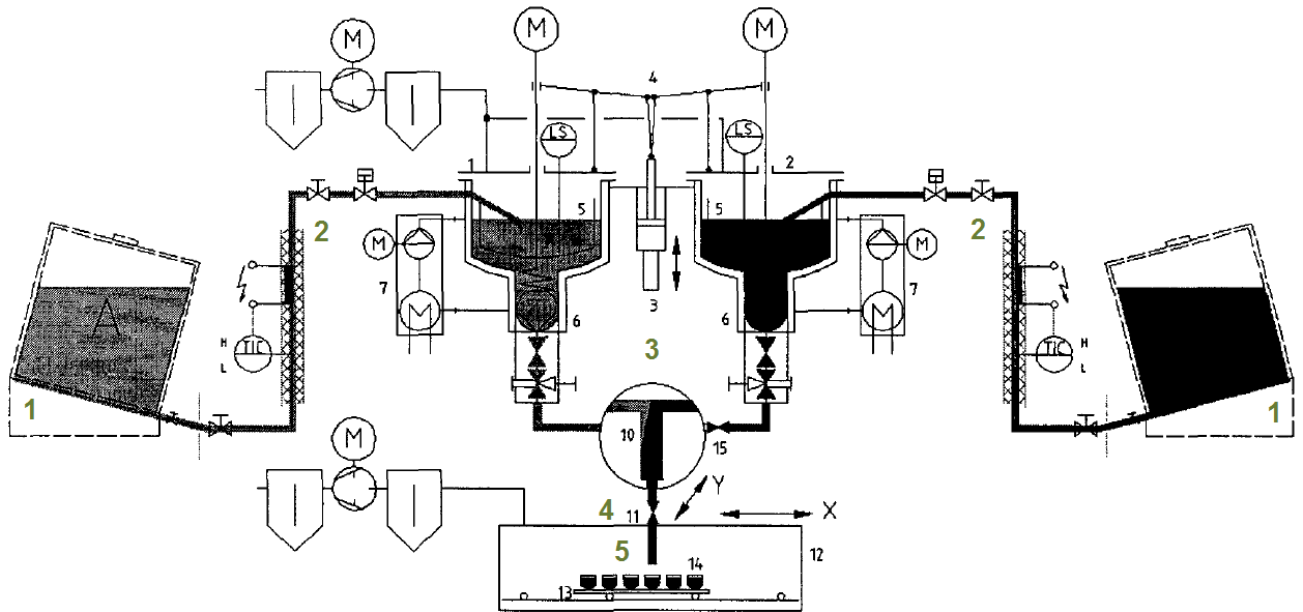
Continuous vacuum preparation and casting system. (1) Vacuum metering mixer, resin component; (2) Vacuum metering mixer, hardener component; (3) Pneumatic central drive; (4) Lever arm system; (5) Stirrer; (6) Metering pumps; (7) Heat exchanger; (10) Static mixer; (11) Reactive mix outlet valve; (12) Vacuum casting chamber; (13) Pallet; (14) Casting mould; and (15) Resin flush valve. Source: (16)
